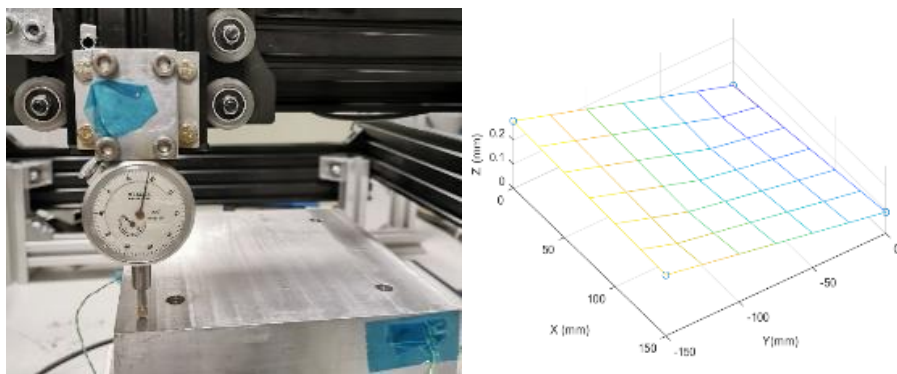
Left: measuring the alignment of the mould. Right: surface mapping of the mould.
